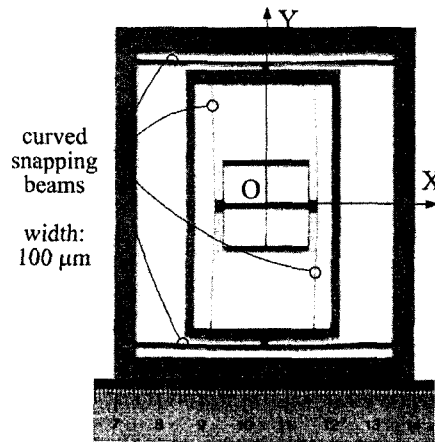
The brass prototype fabricated by ultra precision milling (70×80 mm<sup>2</sup>)
